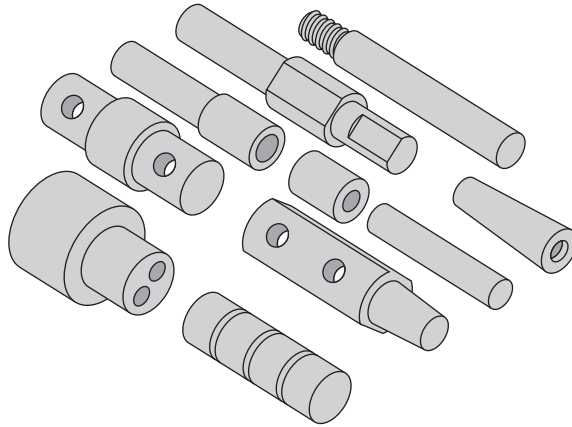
A family of parts with similar manufacturing process requirements but different design attributes. All parts are machined from cylindrical stock by turning; some parts require drilling and/or milling.
